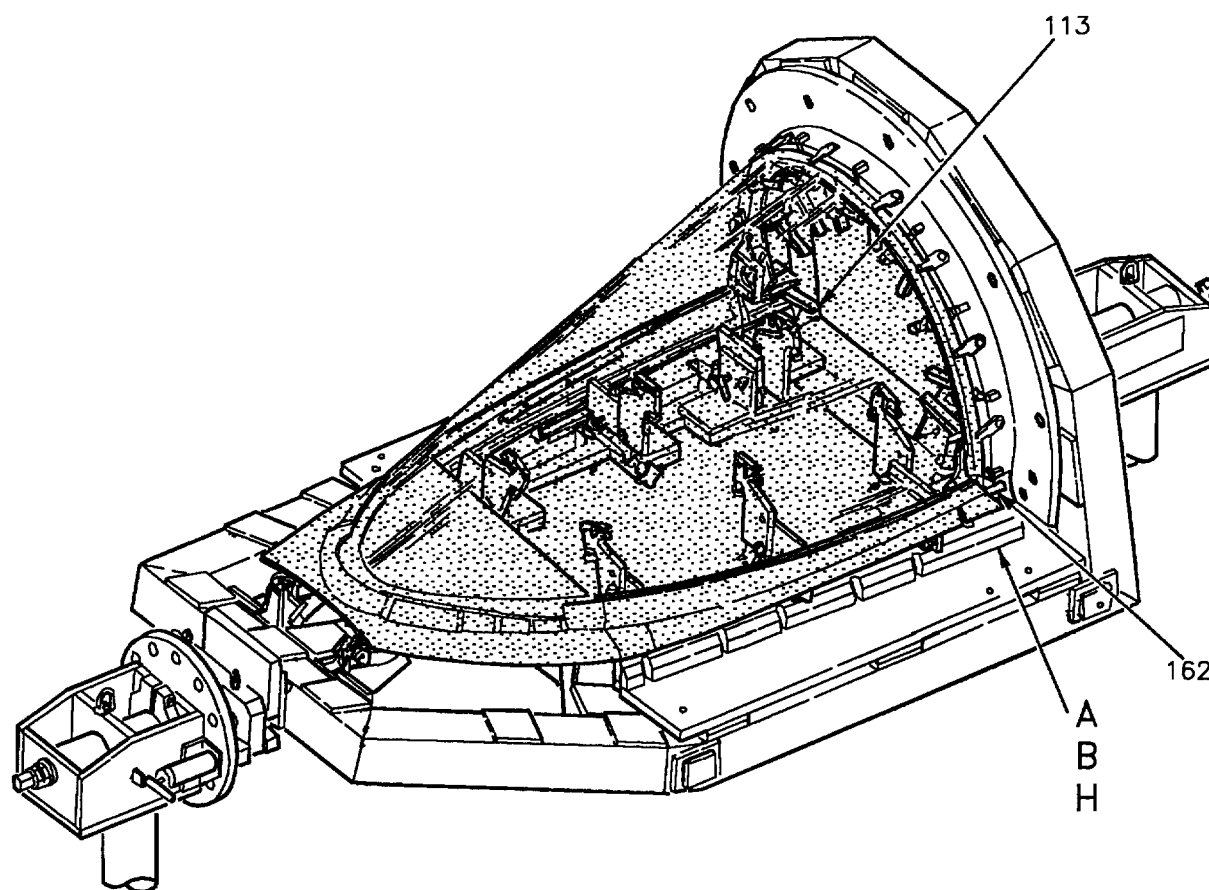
Inspection or Replacement - Aft Support Fitting (Sheet 1)
